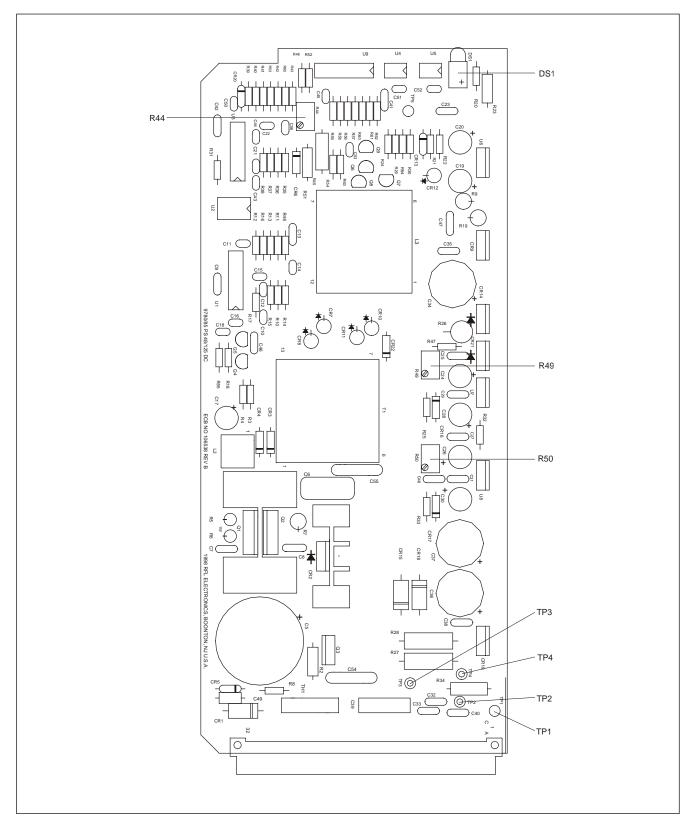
Controls and indicators, and component locator drawing, for FL 9780 power supply module (Assembly No. 106535-1)
